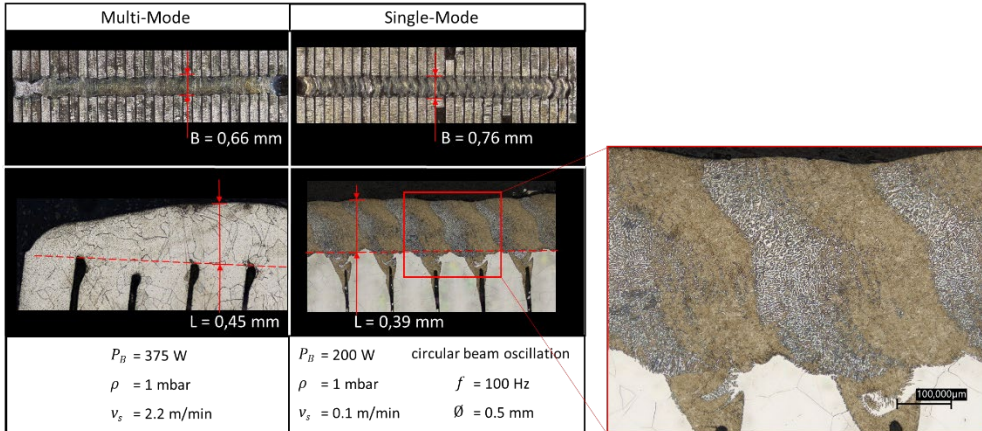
Cross section for line welds of multi-mode (left) and single-mode (middle); detail of single-mode line weld (right)
